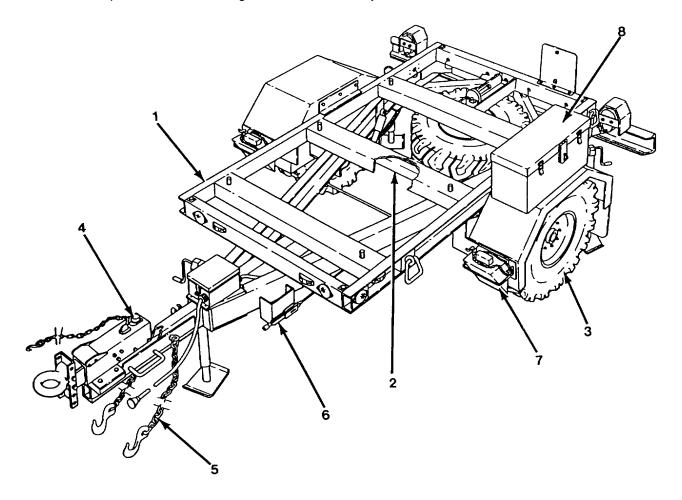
Servicing Unit Body Assembly. (Sheet 1of 2)
